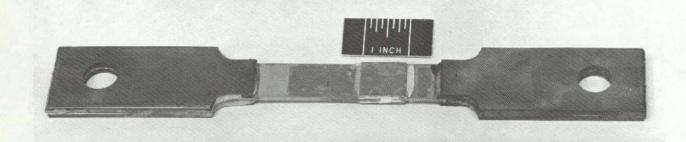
LAP JOINT TEST SPECIMEN (BL7)
